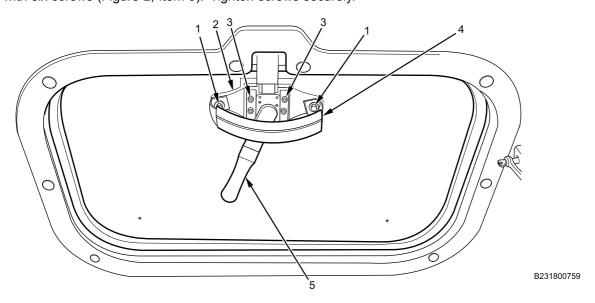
Emergency Hatch Handle/Lock Assembly and Grab Handle Installation.
